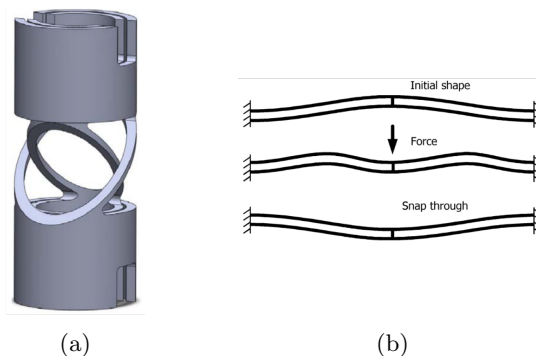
(a) Elliptical shaped beam flexure in a cylindrical shaped flexure joint [16], (b) Cosine shaped curved beam flexure in a bistable mechanism [17]
